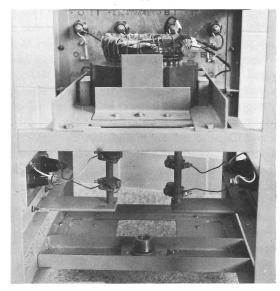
Rear close up view of wound stator shell mounted in supporting frame. Rotor removed.
